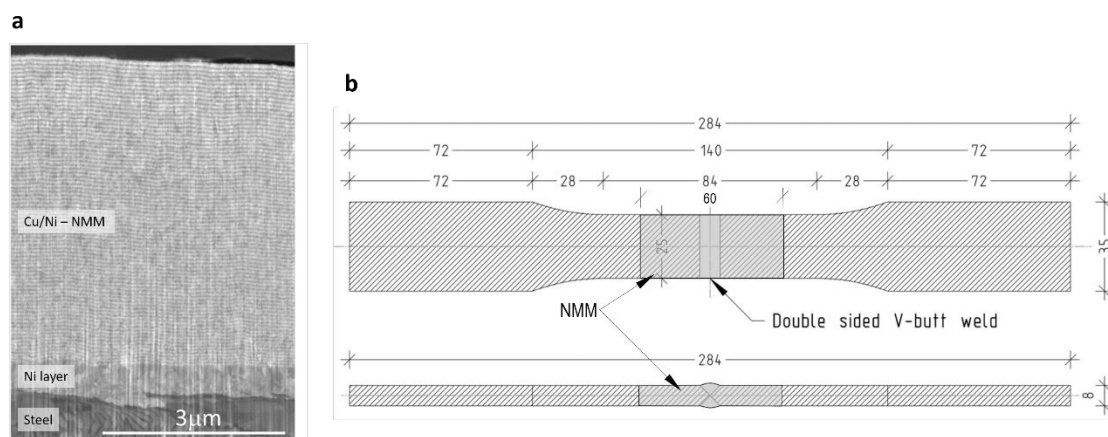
(a) SEM scan of NMM on steel member; (b) S355-J2 flat sample (dogbone) sample geometry type E acc. to DIN 50125 with centric double-sided V-butt weld and NMM dimensions (Brunow et al., 2023).
